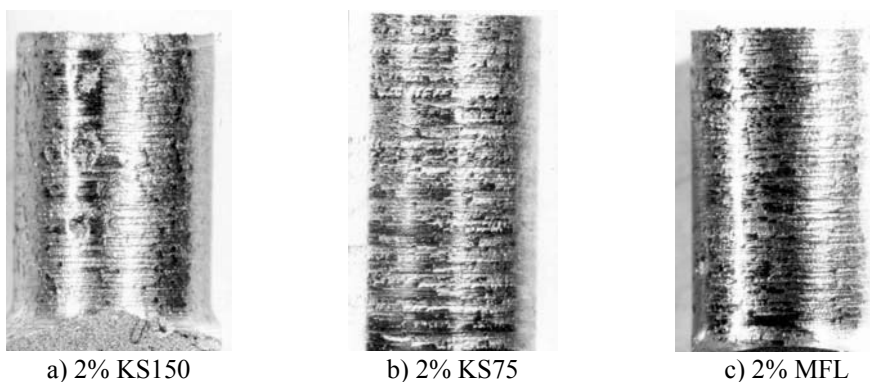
Machined surfaces of sintered Fe-0.8%C (fine) containing admixed coarse graphite grades. Sintered 60 min 1070°C in H_2 /getter. Finish turning, hardmetal insert P20, $v_c = 15$ m/min, 0.15 mm/rev.
